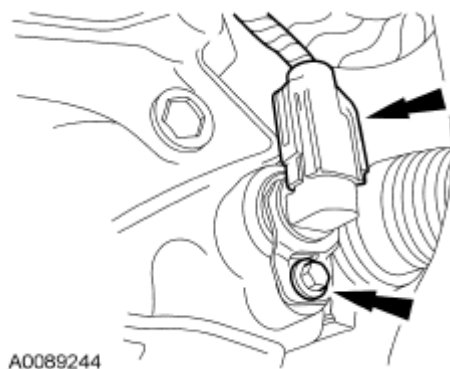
Locating Output Shaft Speed (OSS) Sensor
